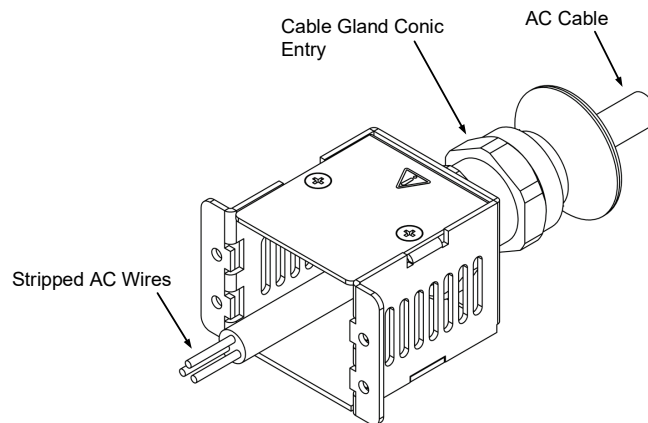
Insertion of the AC Cable through the Cable Gland and Strain Relief Bracket Assembly
